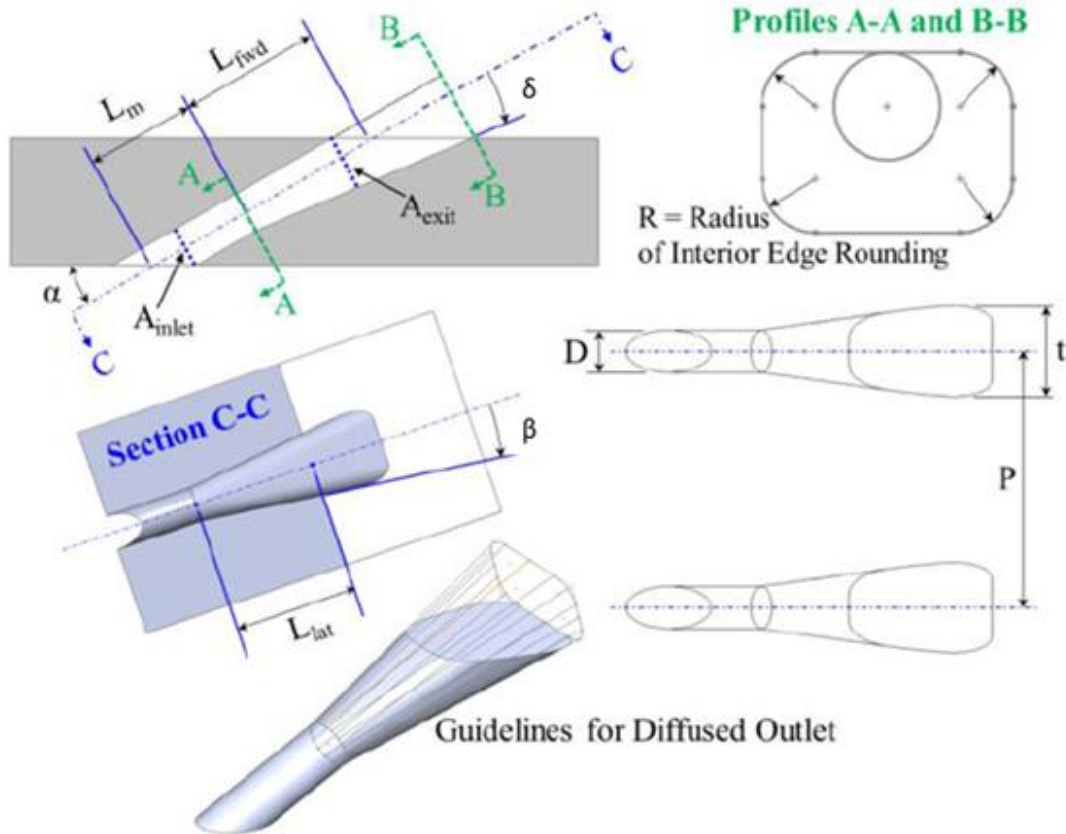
7-7-7 shaped film cooling hole geometry [15]
